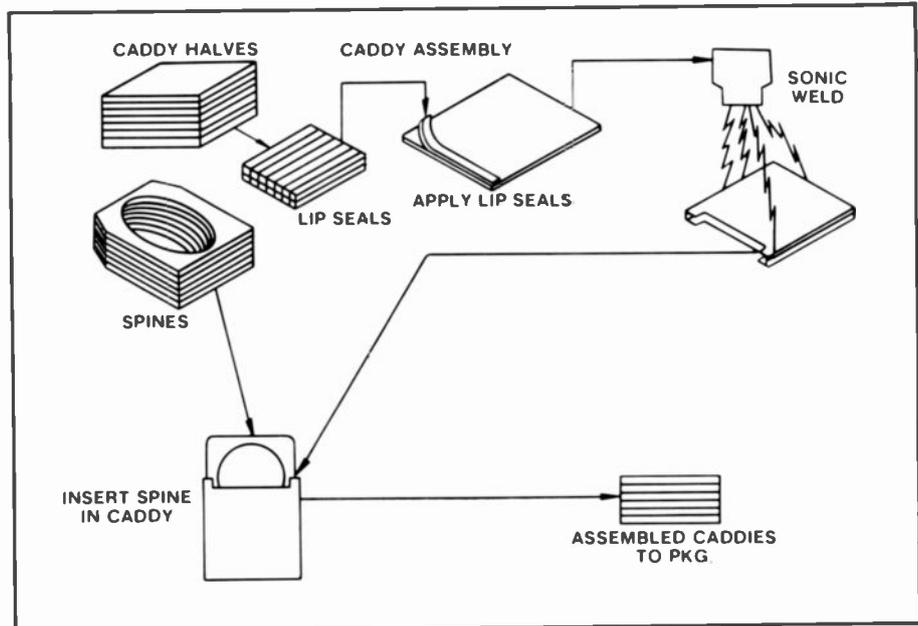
Caddy assembly sequence. After lip seals are applied, plastic caddy halves are ultrasonically welded. The spine, which will hold the disc, is inserted into the caddy.
